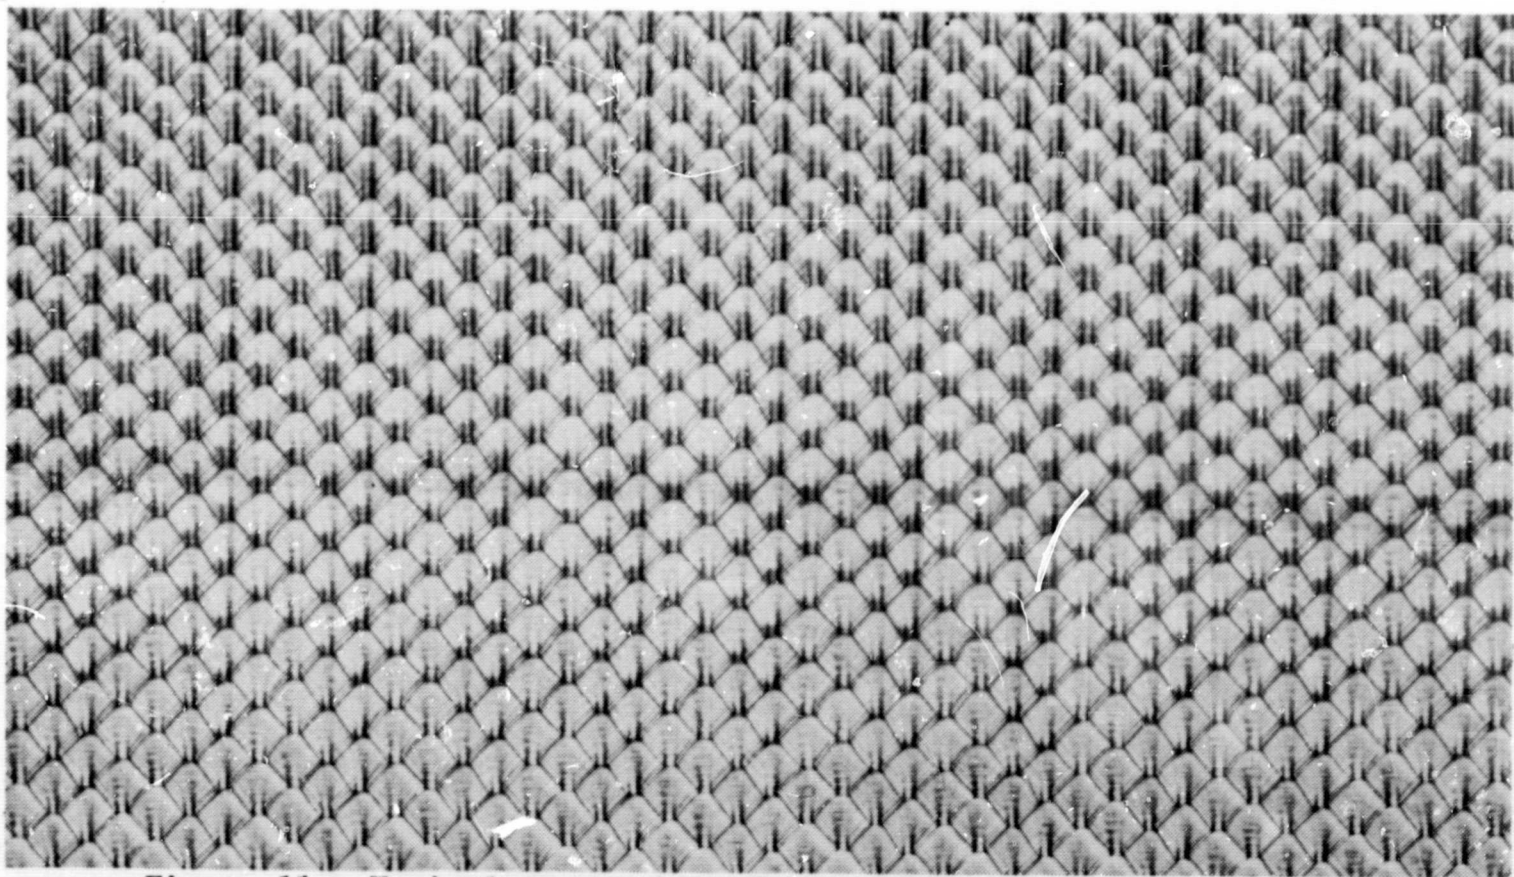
Typical x-ray view of honeycomb panel L9000002-1005 - bottom surface.
